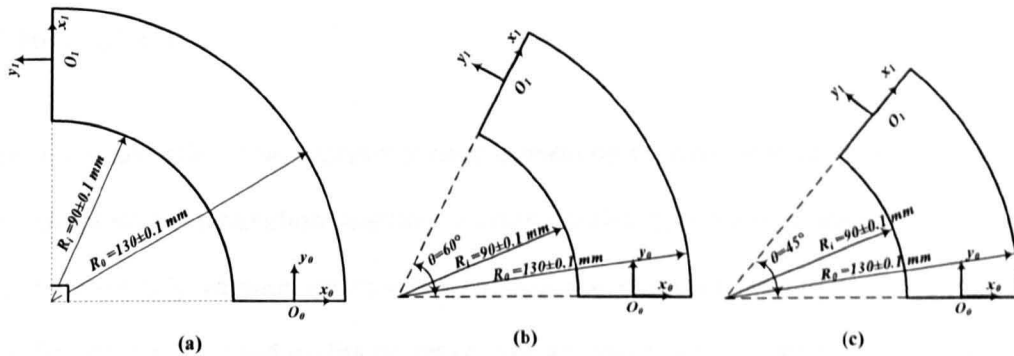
Nominal dimensions of a uniformly segmented 2D circular component: (a) for four component assembly; (b) for six component assembly; (c) for eight component assembly.
